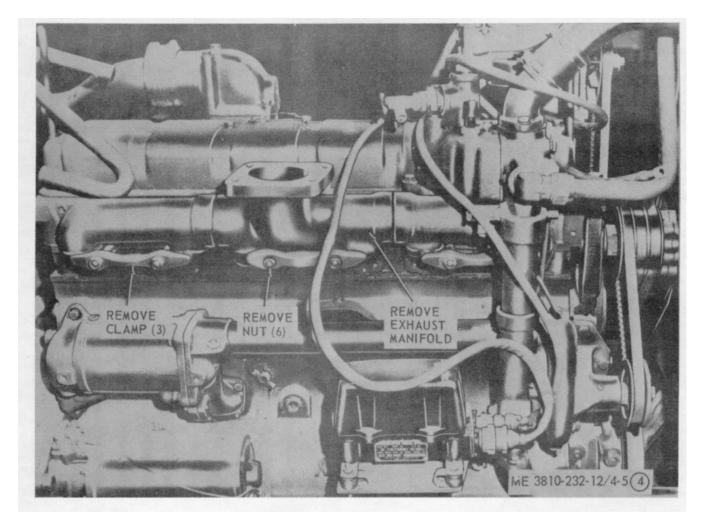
Crane engine, exhaust assembly, intake ad exhaust manifolds, removal and installation. Sheet 4 of 4.
